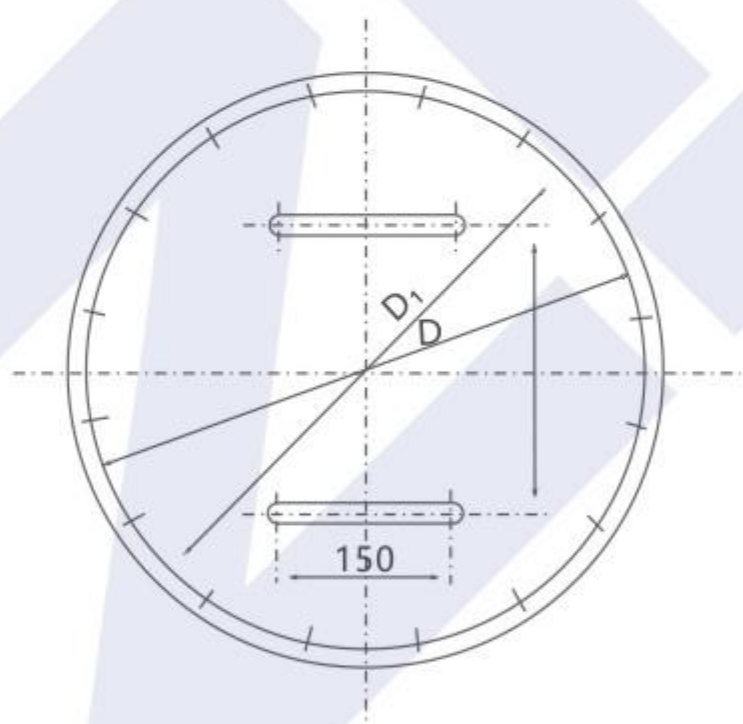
PLATE FLAT WELDED STEEL PIPE LARGE DIAMETER FLANGE
